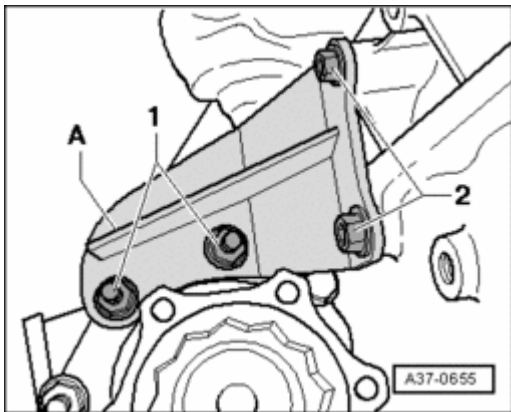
Identifying Bracket For Bevel Box & Bolts
